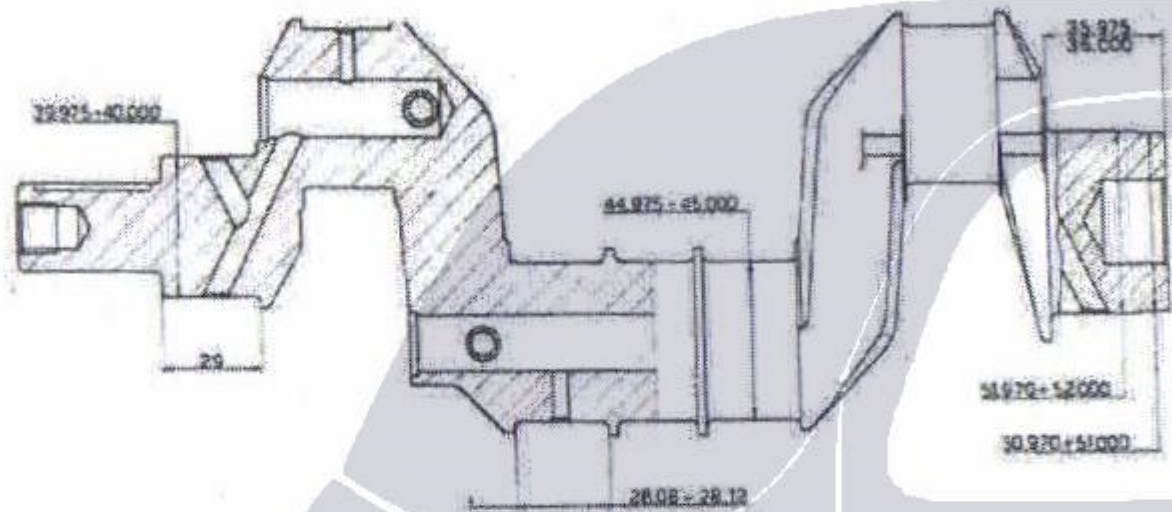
Crankshaft and main bearings, starting from engine No. 006619.
